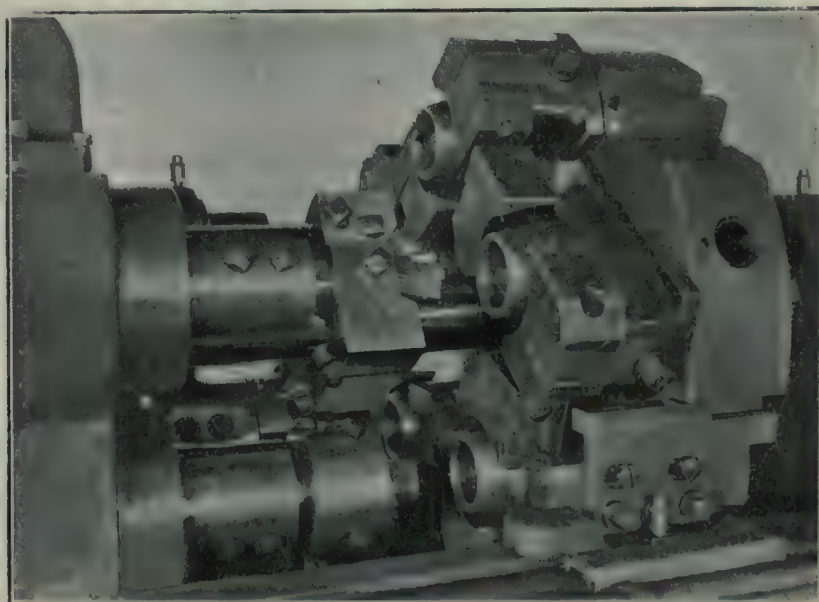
VIEW OF CHUCK JAWS FOR SHRAPNEL SHELL HEADS.
